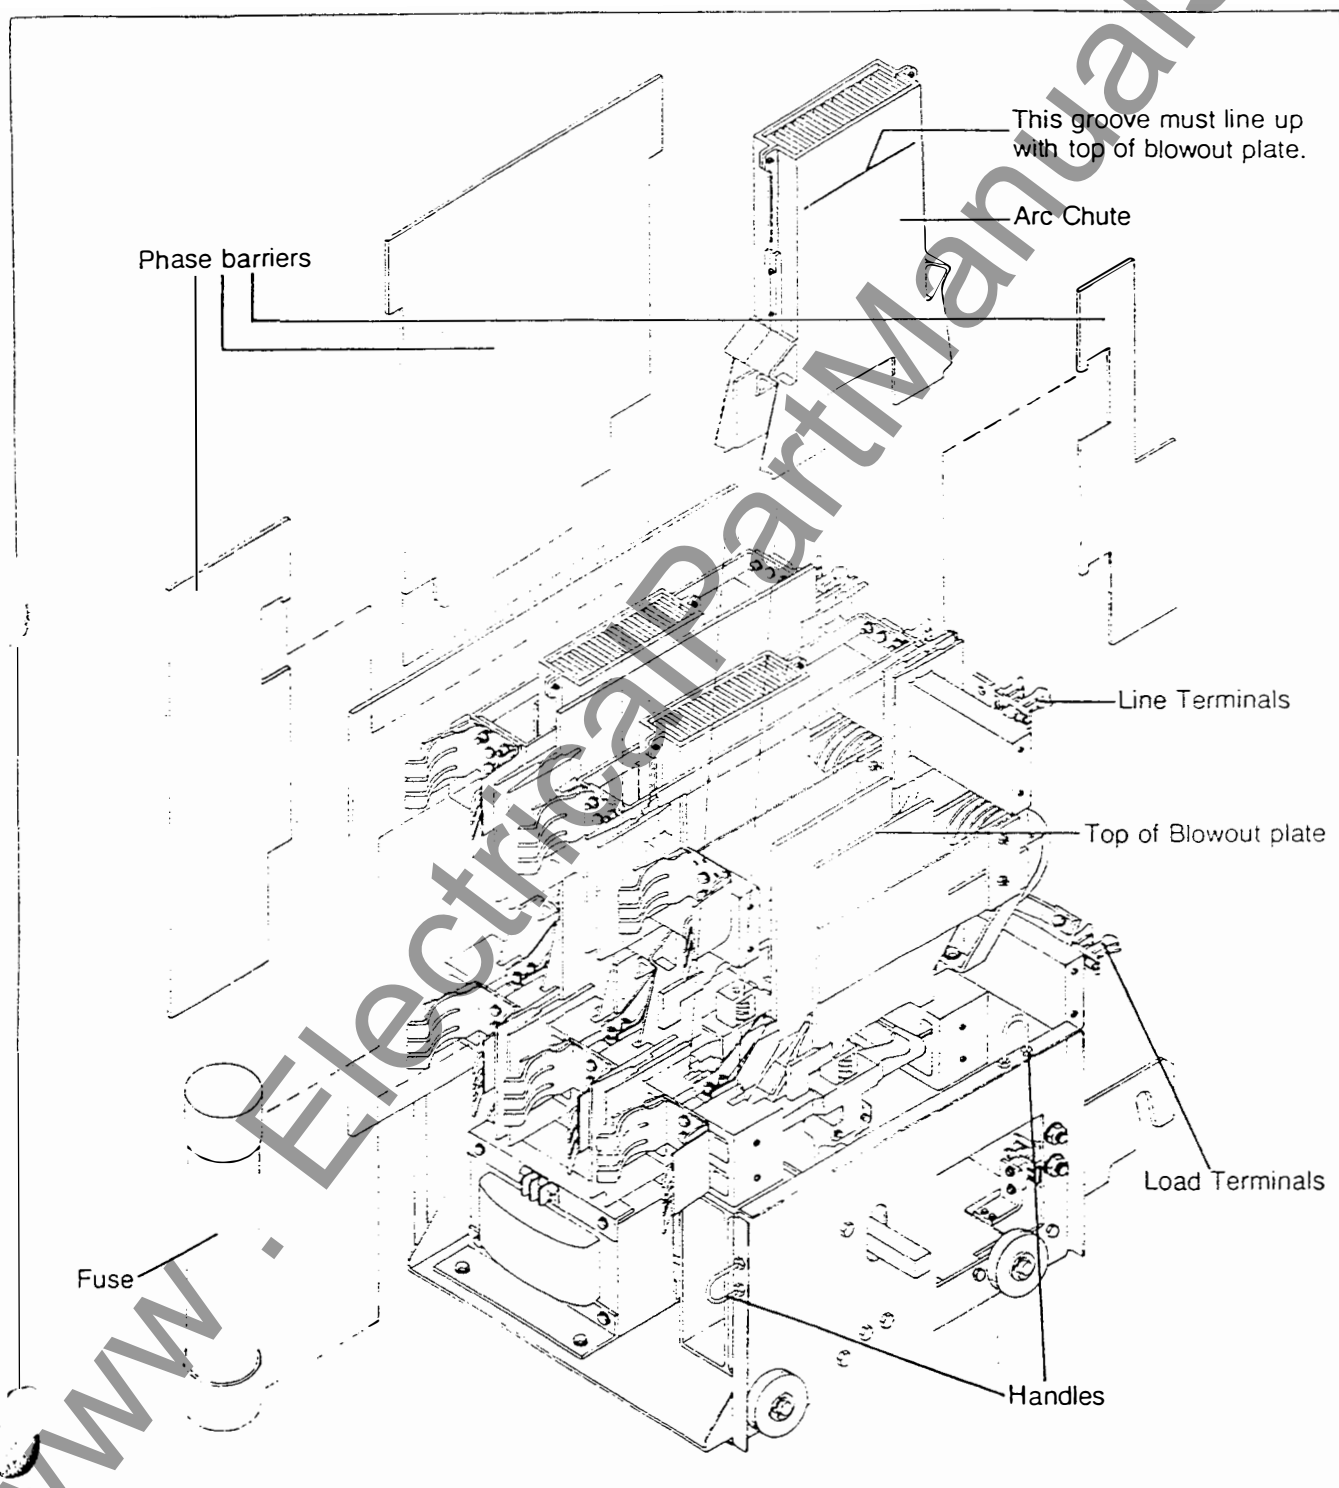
Arc Chute, Phase Barrier and Fuse Location on Contactor Assembly
